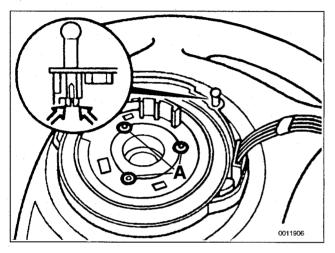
Airbag contact ring locking pin (arrows), as installed on new replacement part from BMW (later production cars). Contact ring mounting screws shown at A.
